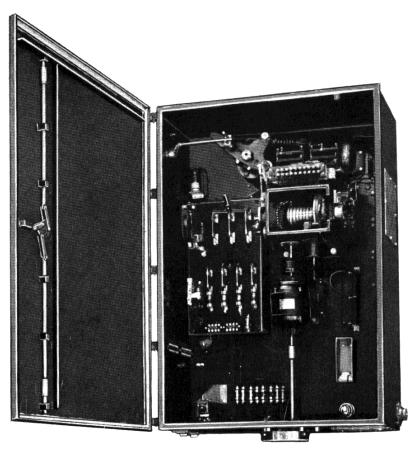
Type BC-1-A Motor Operated Mechanism—Typical Assembly
